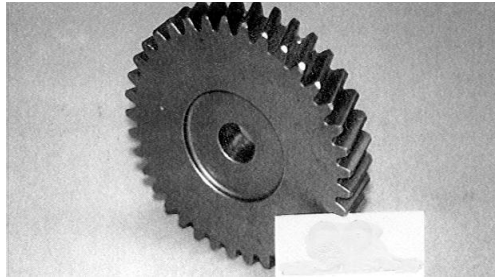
ADI timing gear for a Cummins diesel engine.
